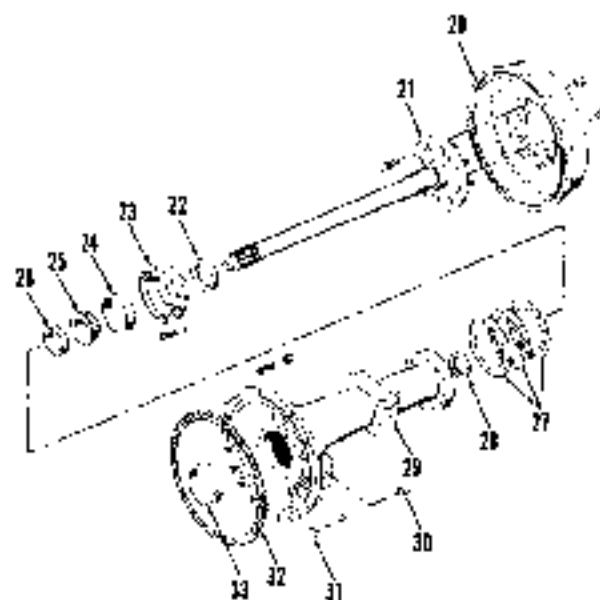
Exploded view of rear axle and associated parts (typical of all tractors except Orchard models and MF250 models).
